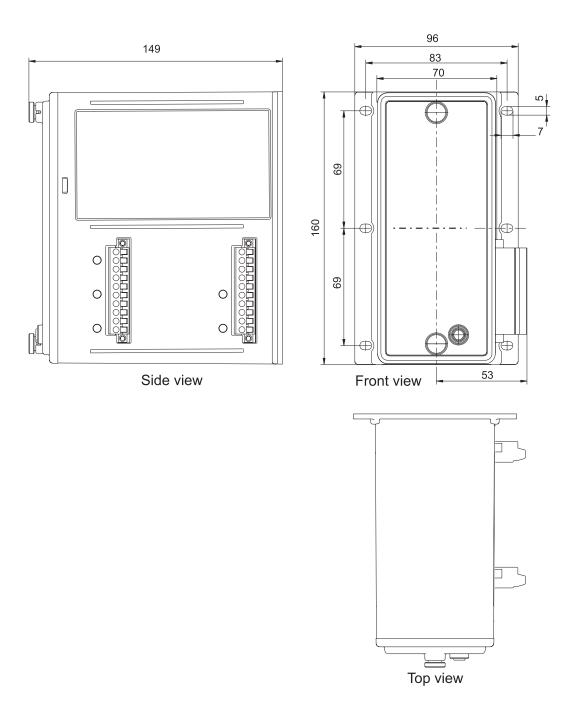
Dimension and mounting details of Self-powered feeder protection REJ603 without HMI
